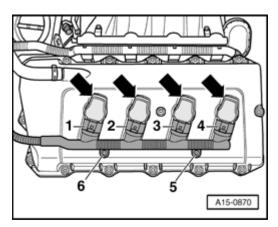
Removing Bolts On Right Cylinder Head, Disconnecting Electrical Harness Connectors &
